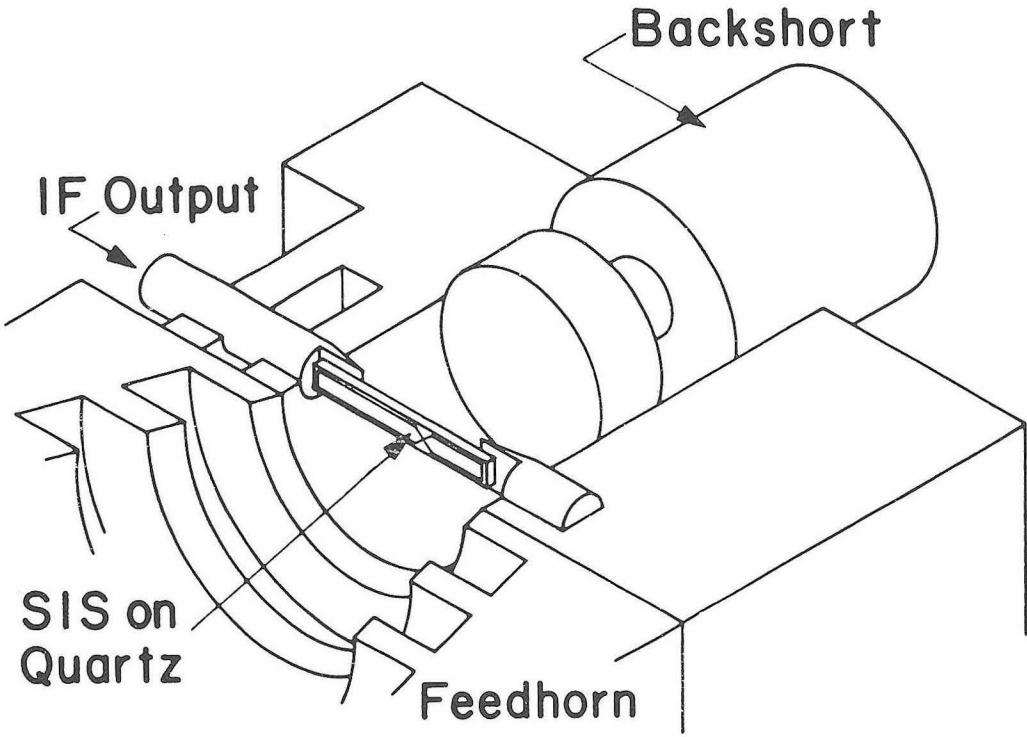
Cutaway drawing of 2.4 mm diameter circular waveguide mixer block.
